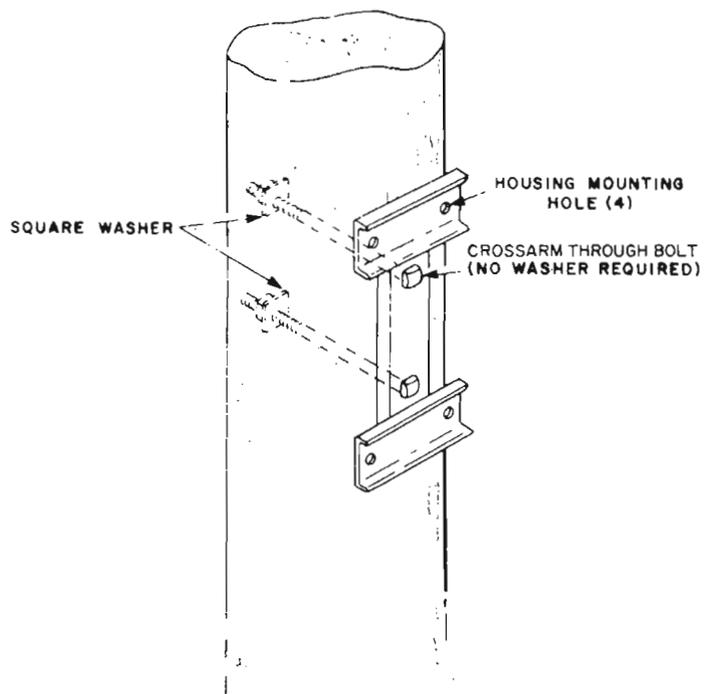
Crossarm Through Bolt and Square Washer Mounting Method for Wood Pole.
